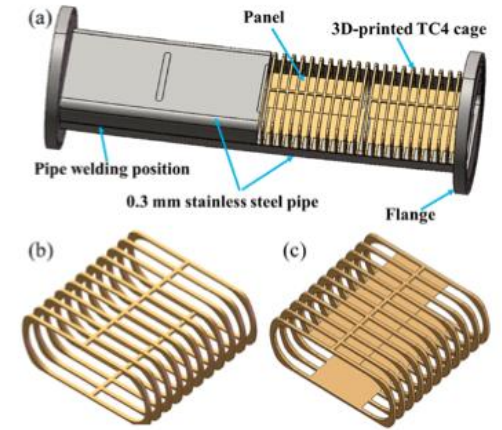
CAD models of (a) thin-walled dipole-magnet vacuum chamber with internal stiffening cage, (b) initial cage design, and (c) cage design with additional cover panels for coupling impedance reduction [230].
